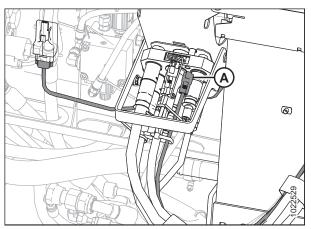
Valve Driver Harness Connection – John Deere Shown
